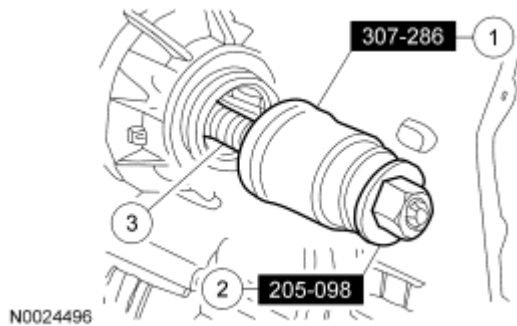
No. 18 Driven Sprocket Bearing Assembly
